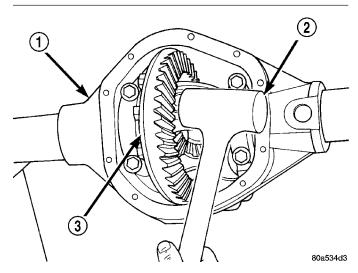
SEAT DUMMY BEARING RING GEAR SIDE
